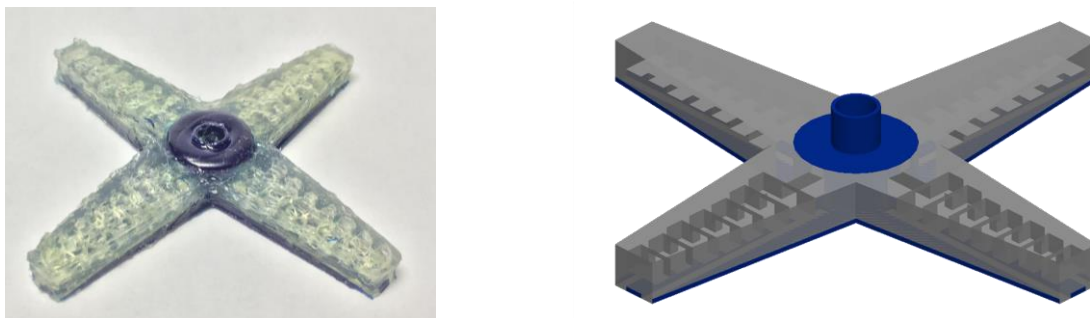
CAD representation and optical image of Hybrid 3D printed pneumatic soft robotic claw gripper
